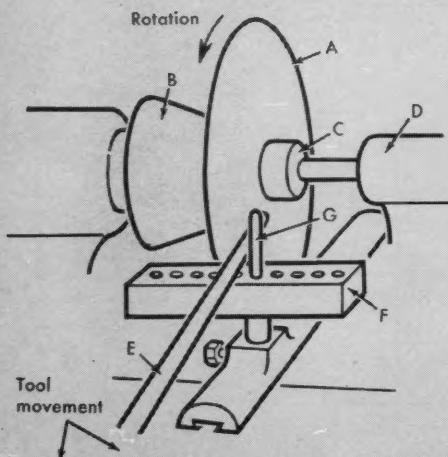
Arrangement of blank and lathe parts for manual spinning operations.
